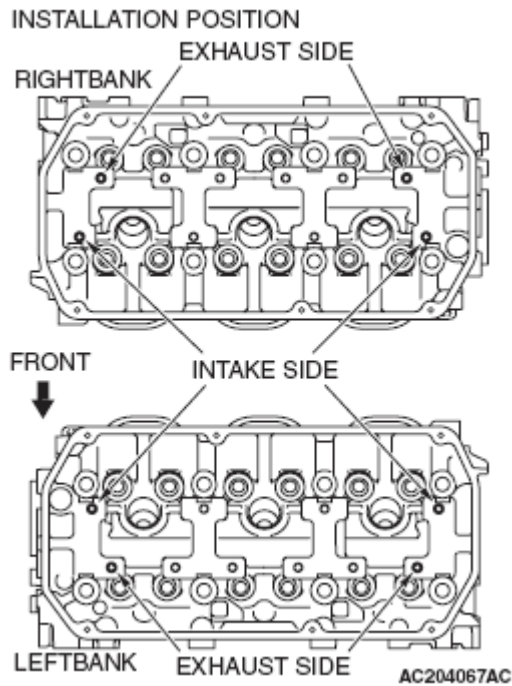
Showing Installation Position Of Intake And Exhaust Cam
